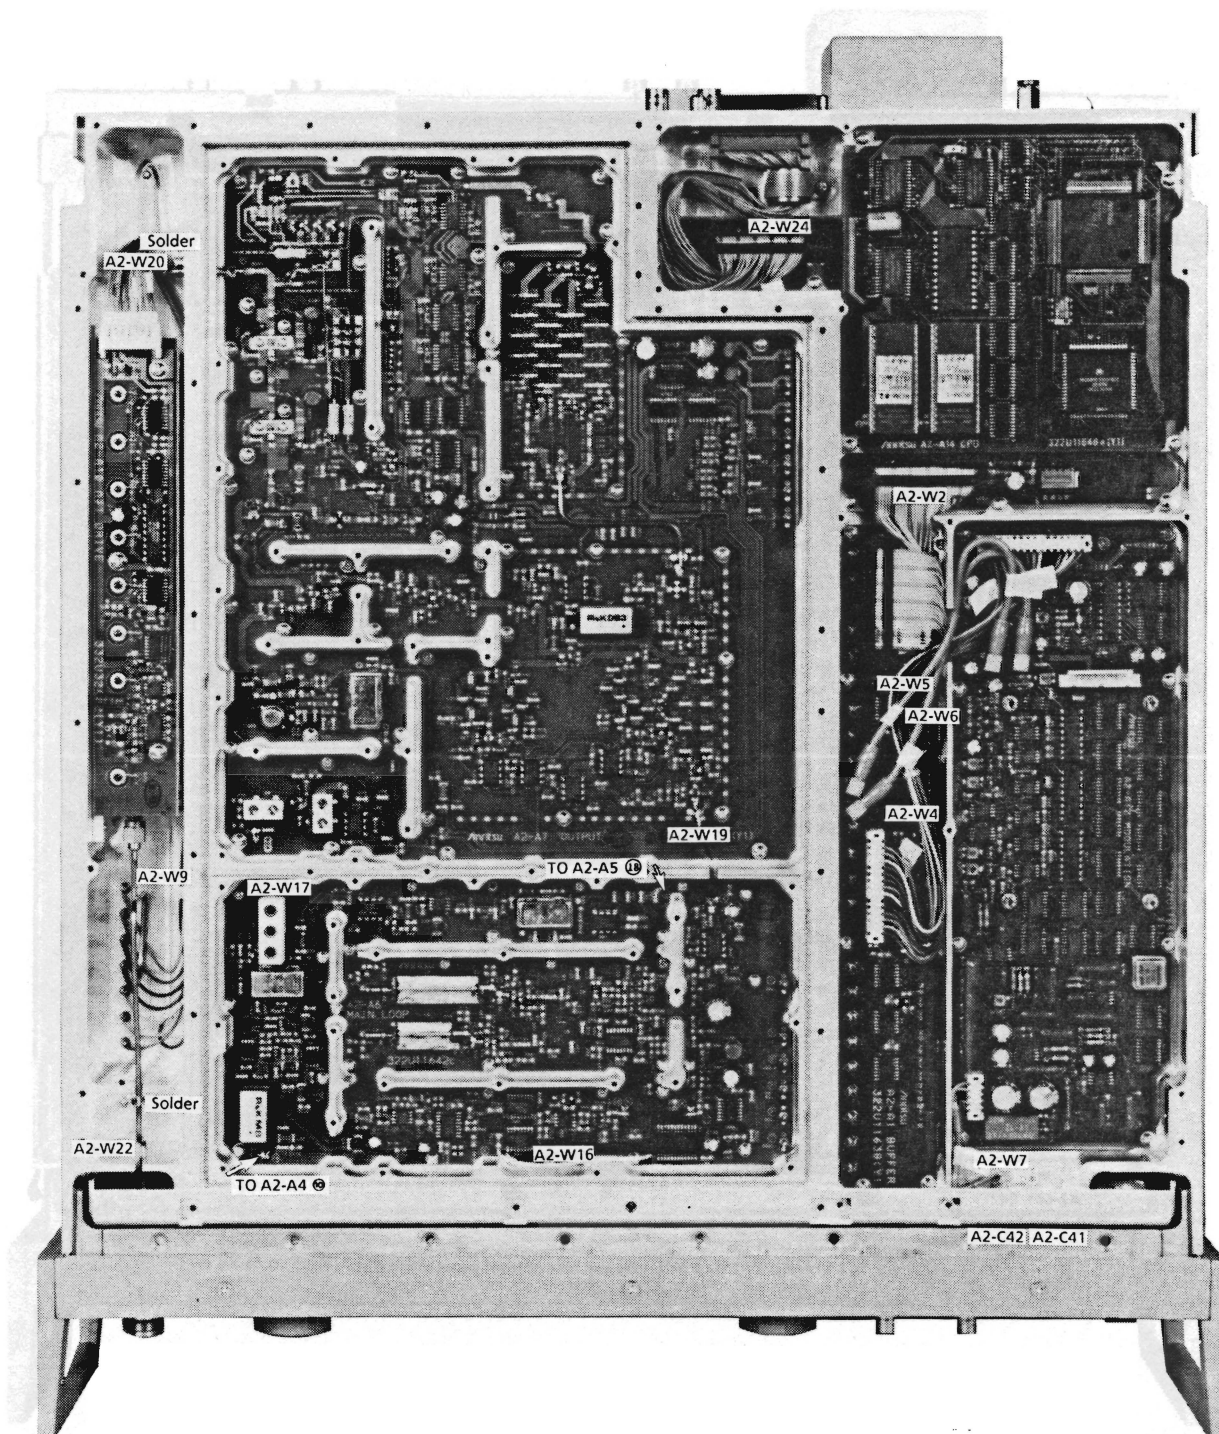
PC-Board Allocation on Bottom Side of Housing
